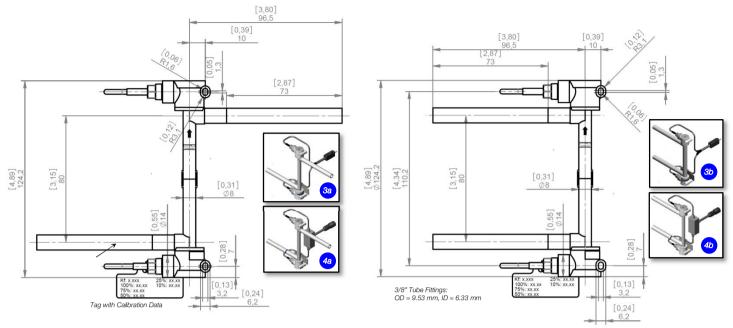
Dimensions of LFS-04L-F1 flow sensor (dimensions in [mm]) Note 1: Dimensions without tolerance are for reference only.
